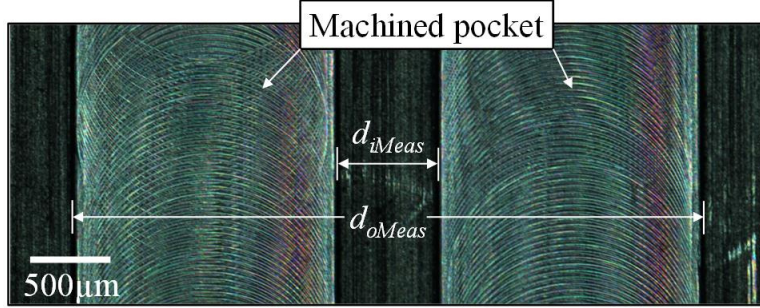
Tool calibration grooves, cut in similar material, form and depth as the cuts used to form the bulk mechanical structure.
